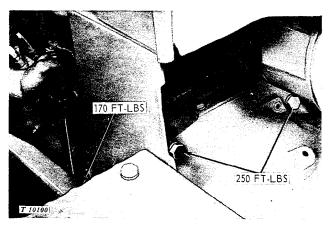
Tightening Engine Attaching Cap Screws
